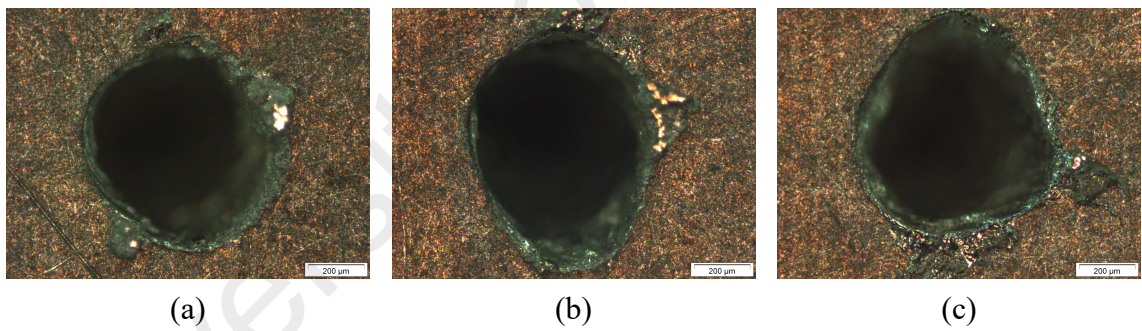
Holes top surfaces of 1000 μm AA5083 sheet
